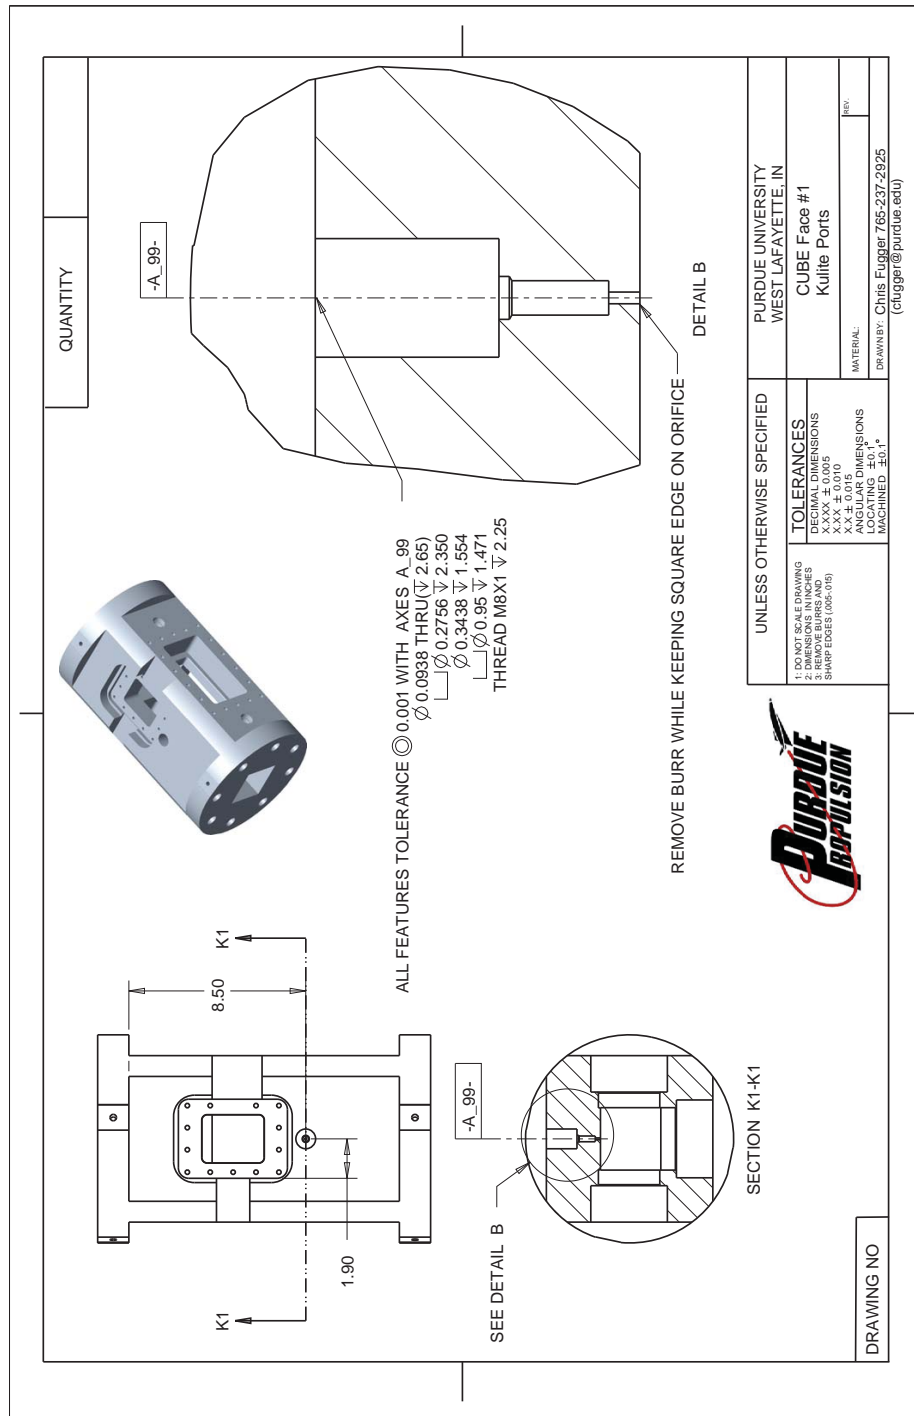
Machine drawing of the high frequency pressure transducer port on the combustor optical test section.
